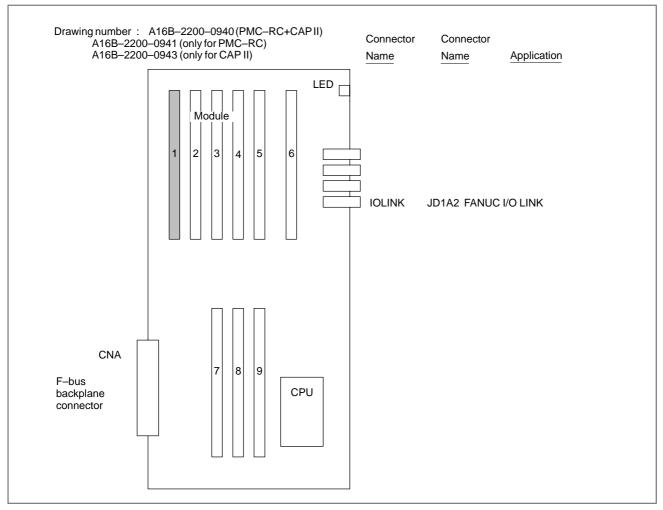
(b) Layout of Parts on Option 3 Board (Series 16)
